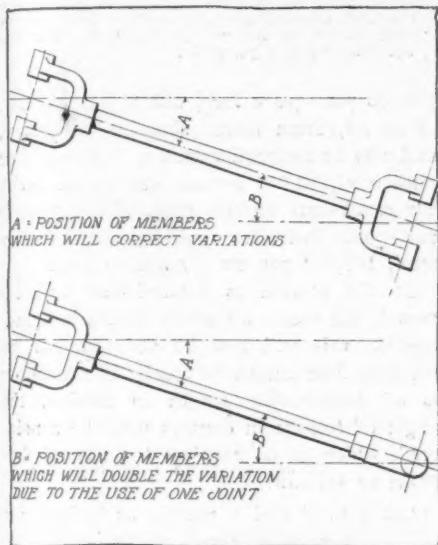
DOUBLE UNIVERSAL JOINT SCHEME
